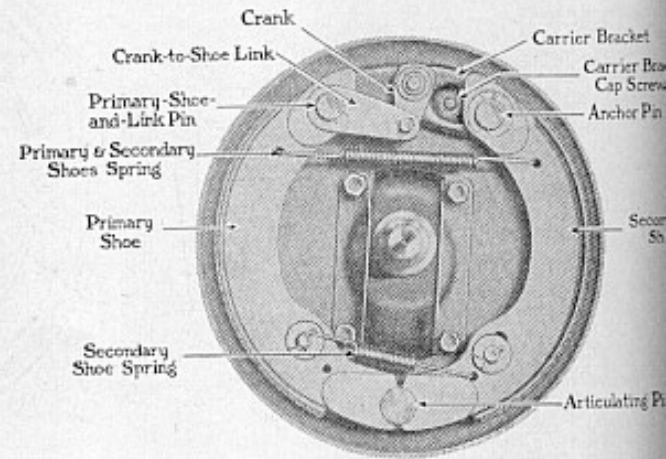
Wheel side of left hand front brake. Note the two-shoe construction
